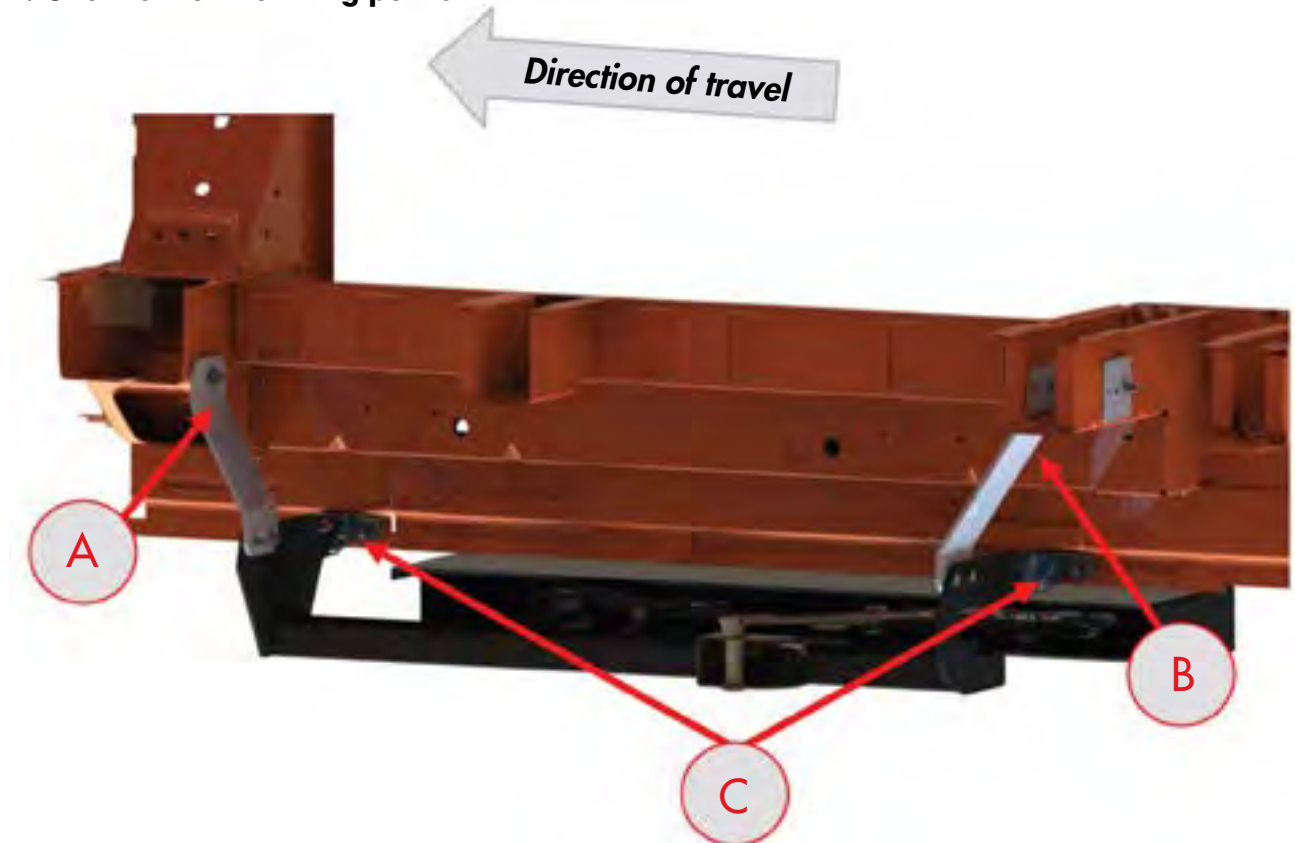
MOUNTING POINTS X3 FORD TRANSIT
